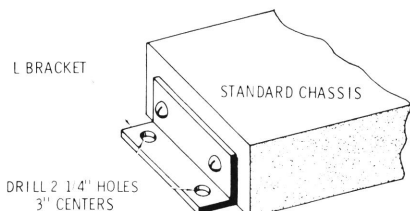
Mounting commercial mobile chassis in a standard 19-inch enclosure.
